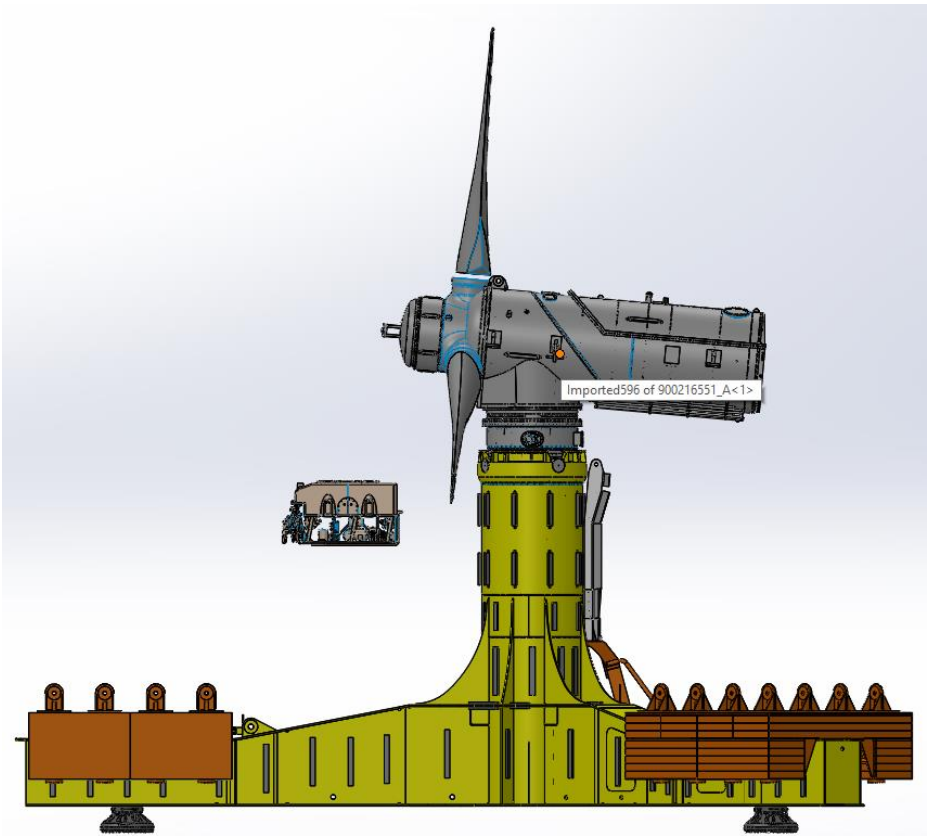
AHH TSS side view with a Millennium WCROV for scale
